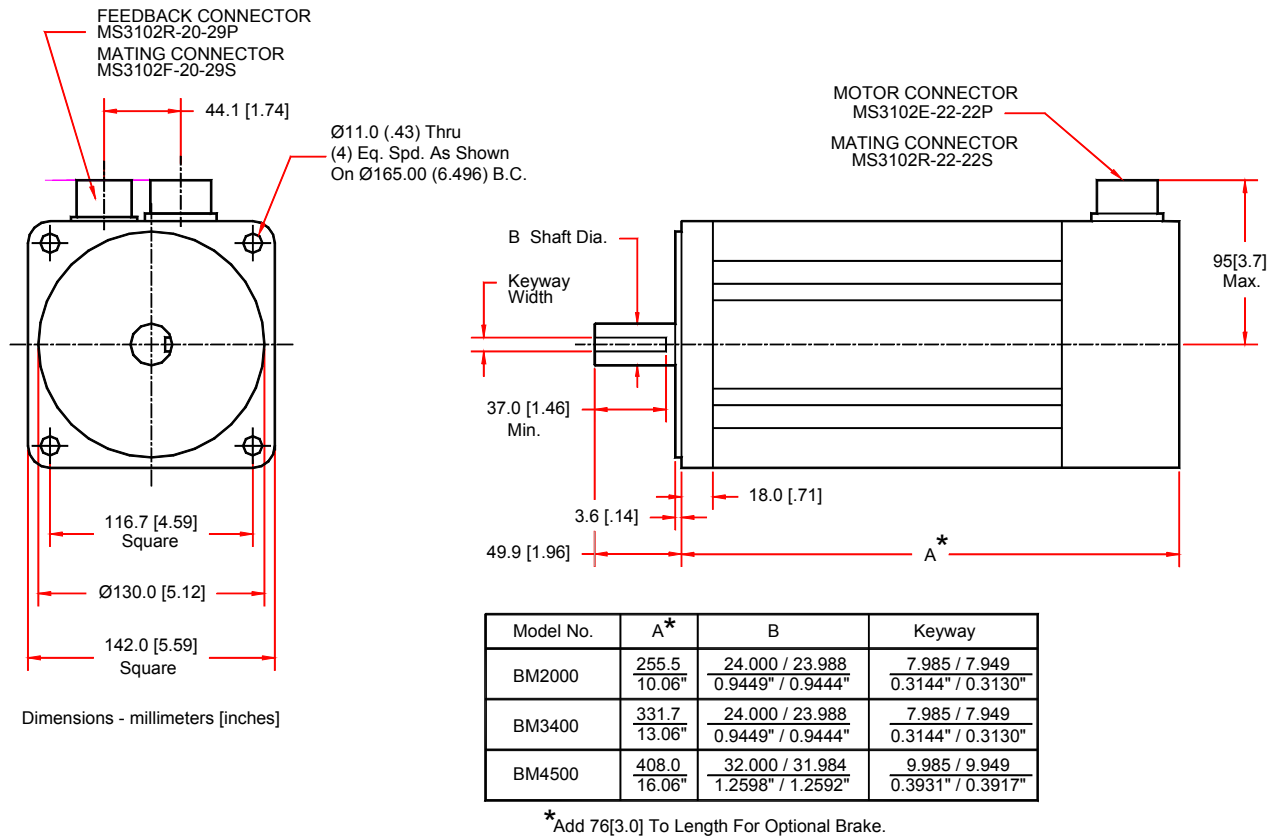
BM2000, BM3400, BM4500 Model Dimensions (IEC 142)
